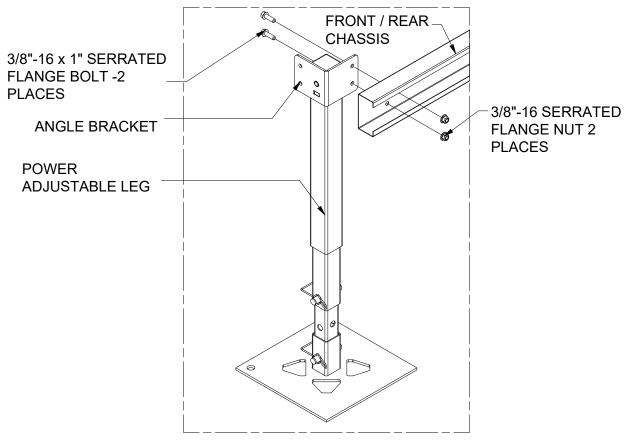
Front/Rear Chassis to Angle Bracket on Power Adjustable Leg
